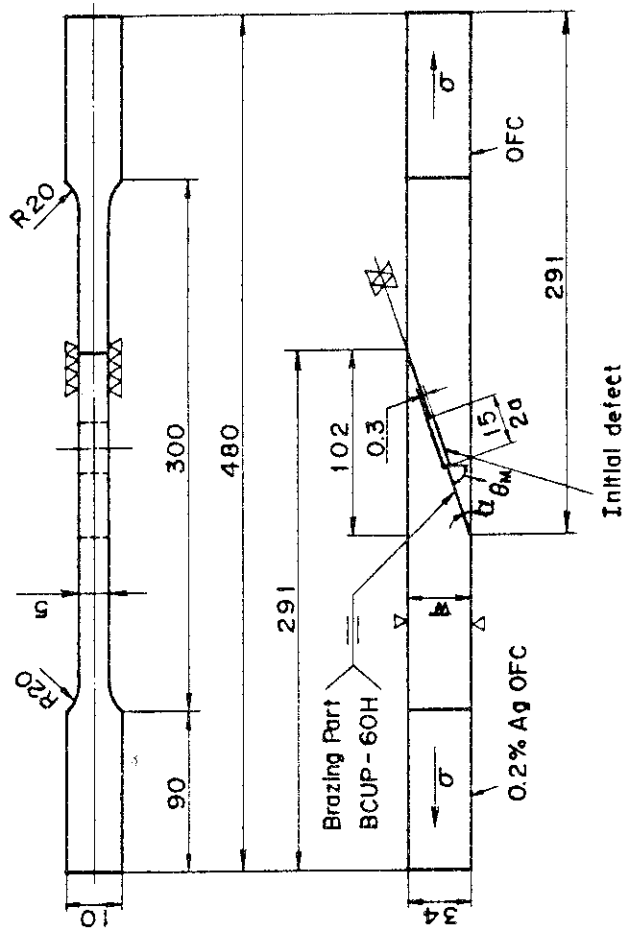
Test Sample for Fatigue Crack Growth
